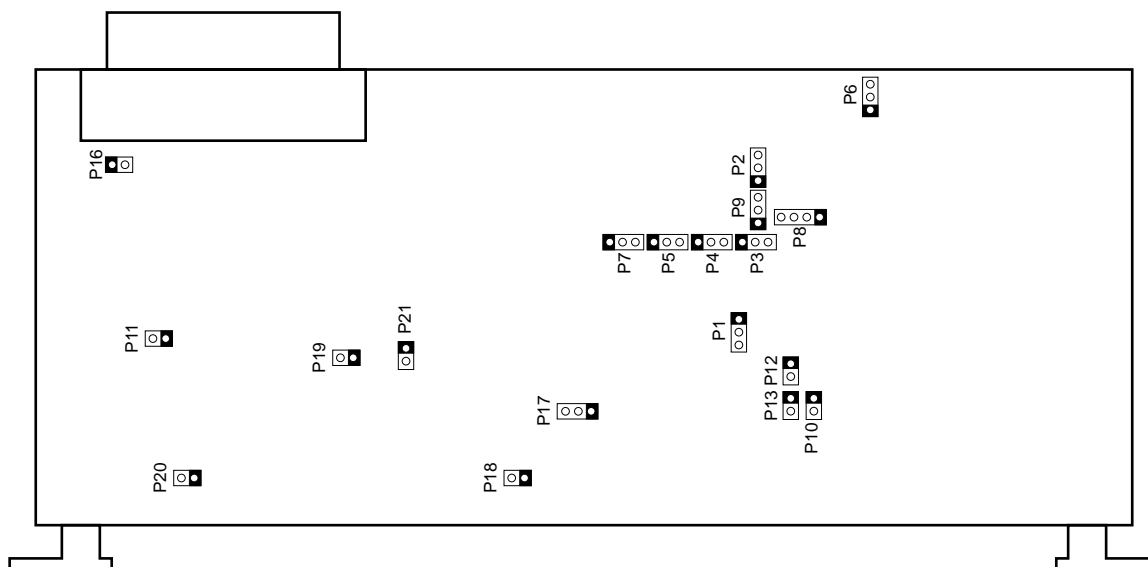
Jumper Positions on CMC6 I/O Board
